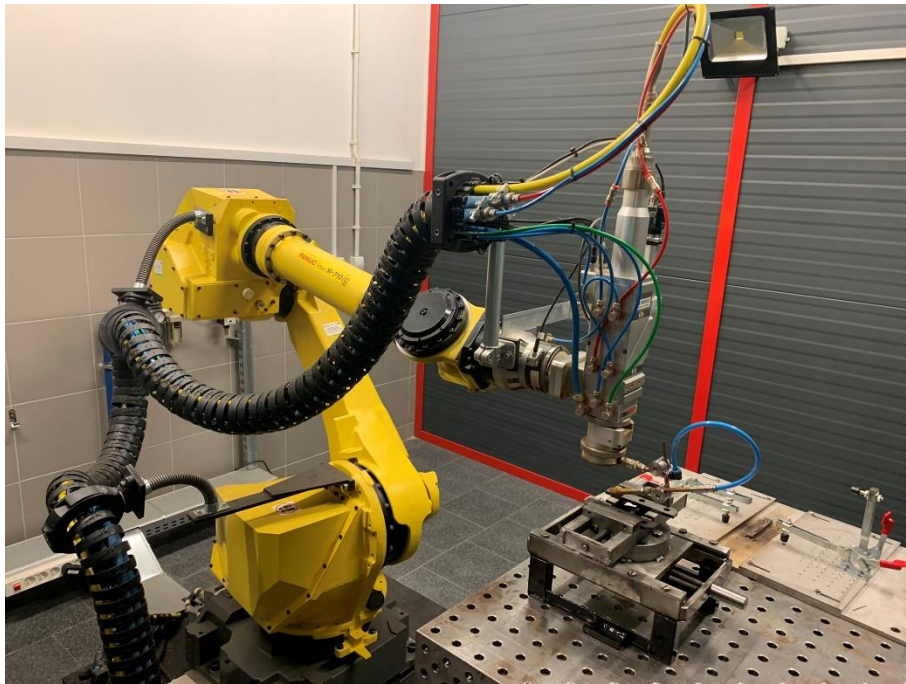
Laser welding robot at Gdańsk University of Technology
